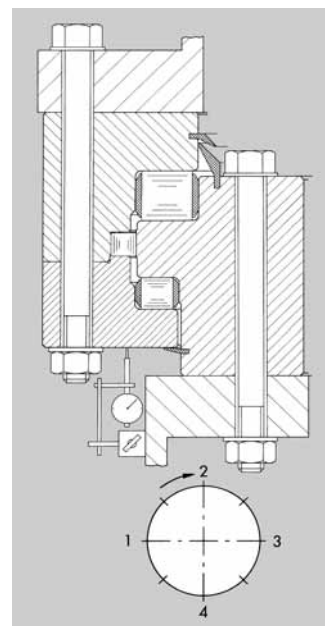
Three-row roller bearing slewing ring – basic test setup for tilting clearance measurement.
